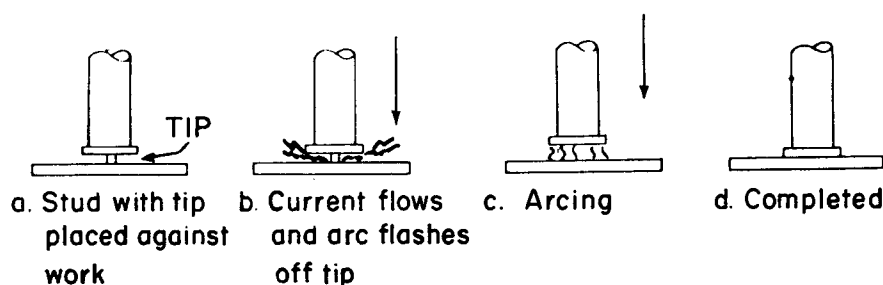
SCHEMATIC DIAGRAM ILLUSTRATING STEPS IN CAPACITOR DISCHARGE STUD WELDING
